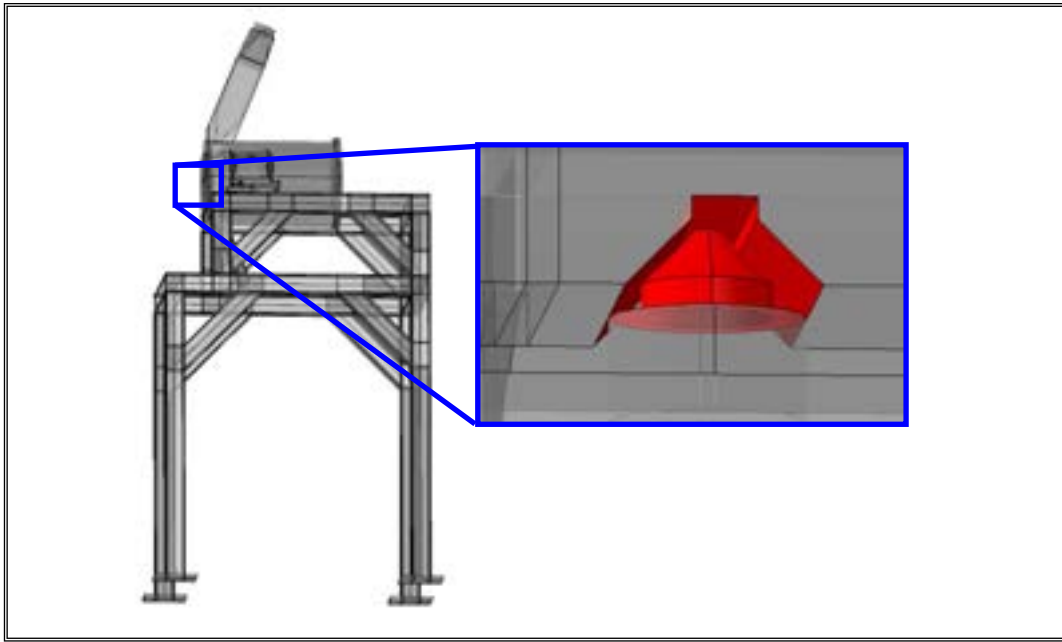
Contact surfaces between TA and its Support structure - Detail of sliding pin.
